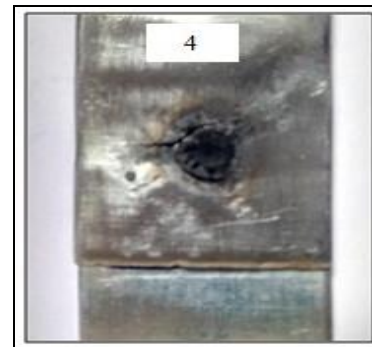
Fatigue crack formation in the laser spot welded fatigue specimen
